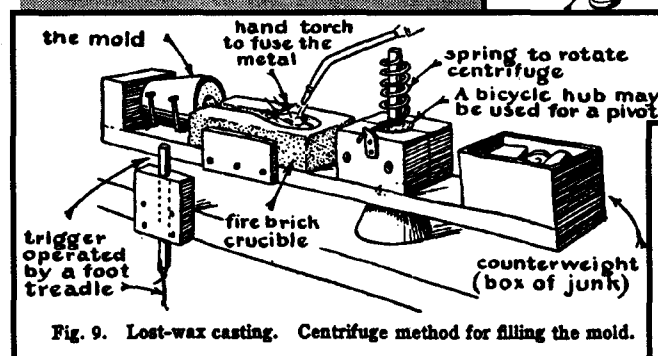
Lost-wax casting. Centrifuge method for filling the mold.
